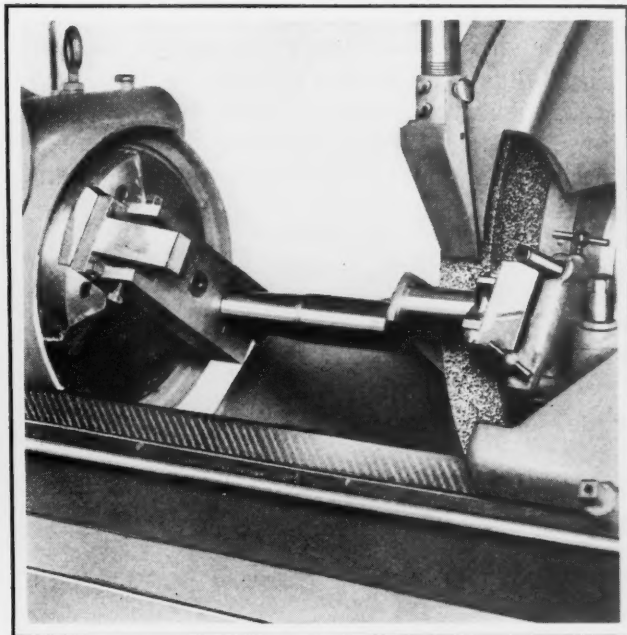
Grinding the Line Bearings and Crankpins of a Single-throw Crankshaft for Airplane Engines
